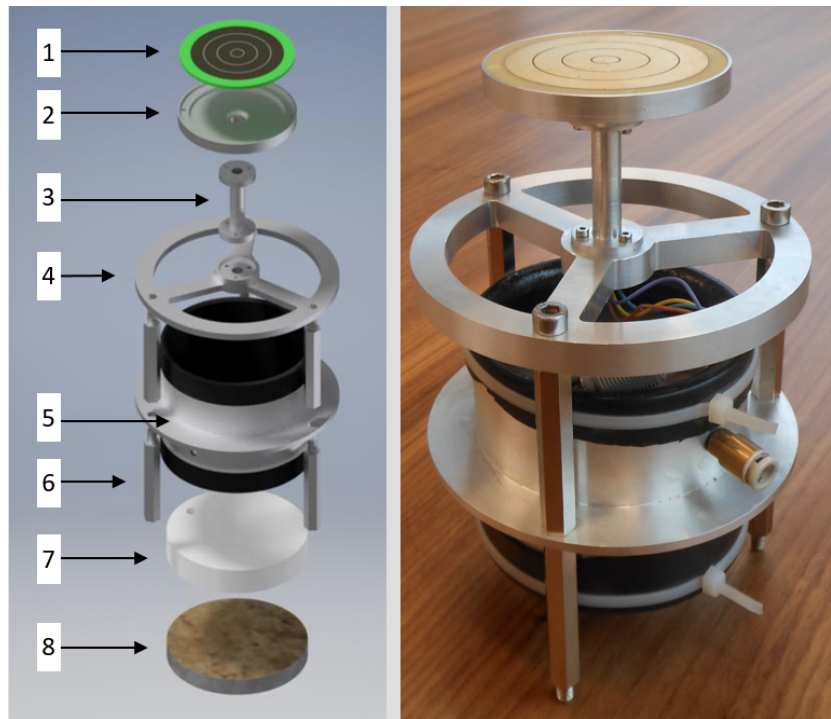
Left a) Exploded view of the 3D model with: 1) Target, 2) Cone, 3) Rod, 4) Upper part, 5) Holder (with rubber tube inside), 6) Spacer, 7) Impervious disk, 8) Sample, Right b) Photograph of the sample support.
